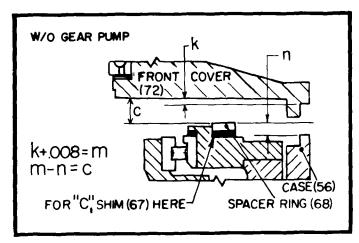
Slideblock End Clearance W/O Gear Pump. (508644)
